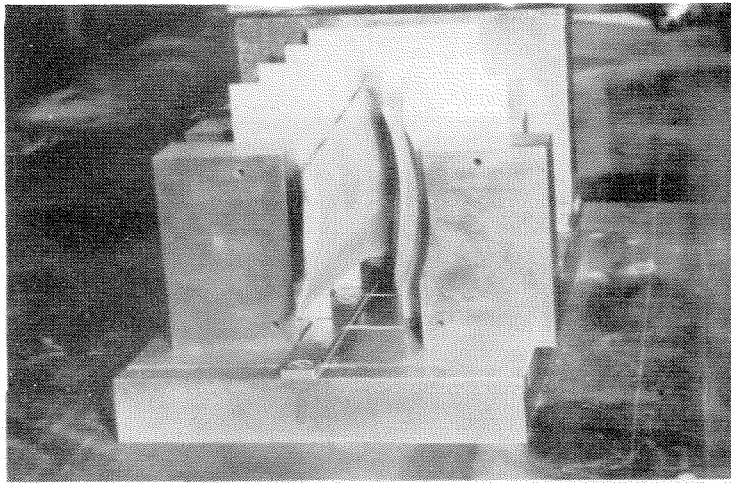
BLADE BEING FINISHED WITH SECTION TEMPLATES.
